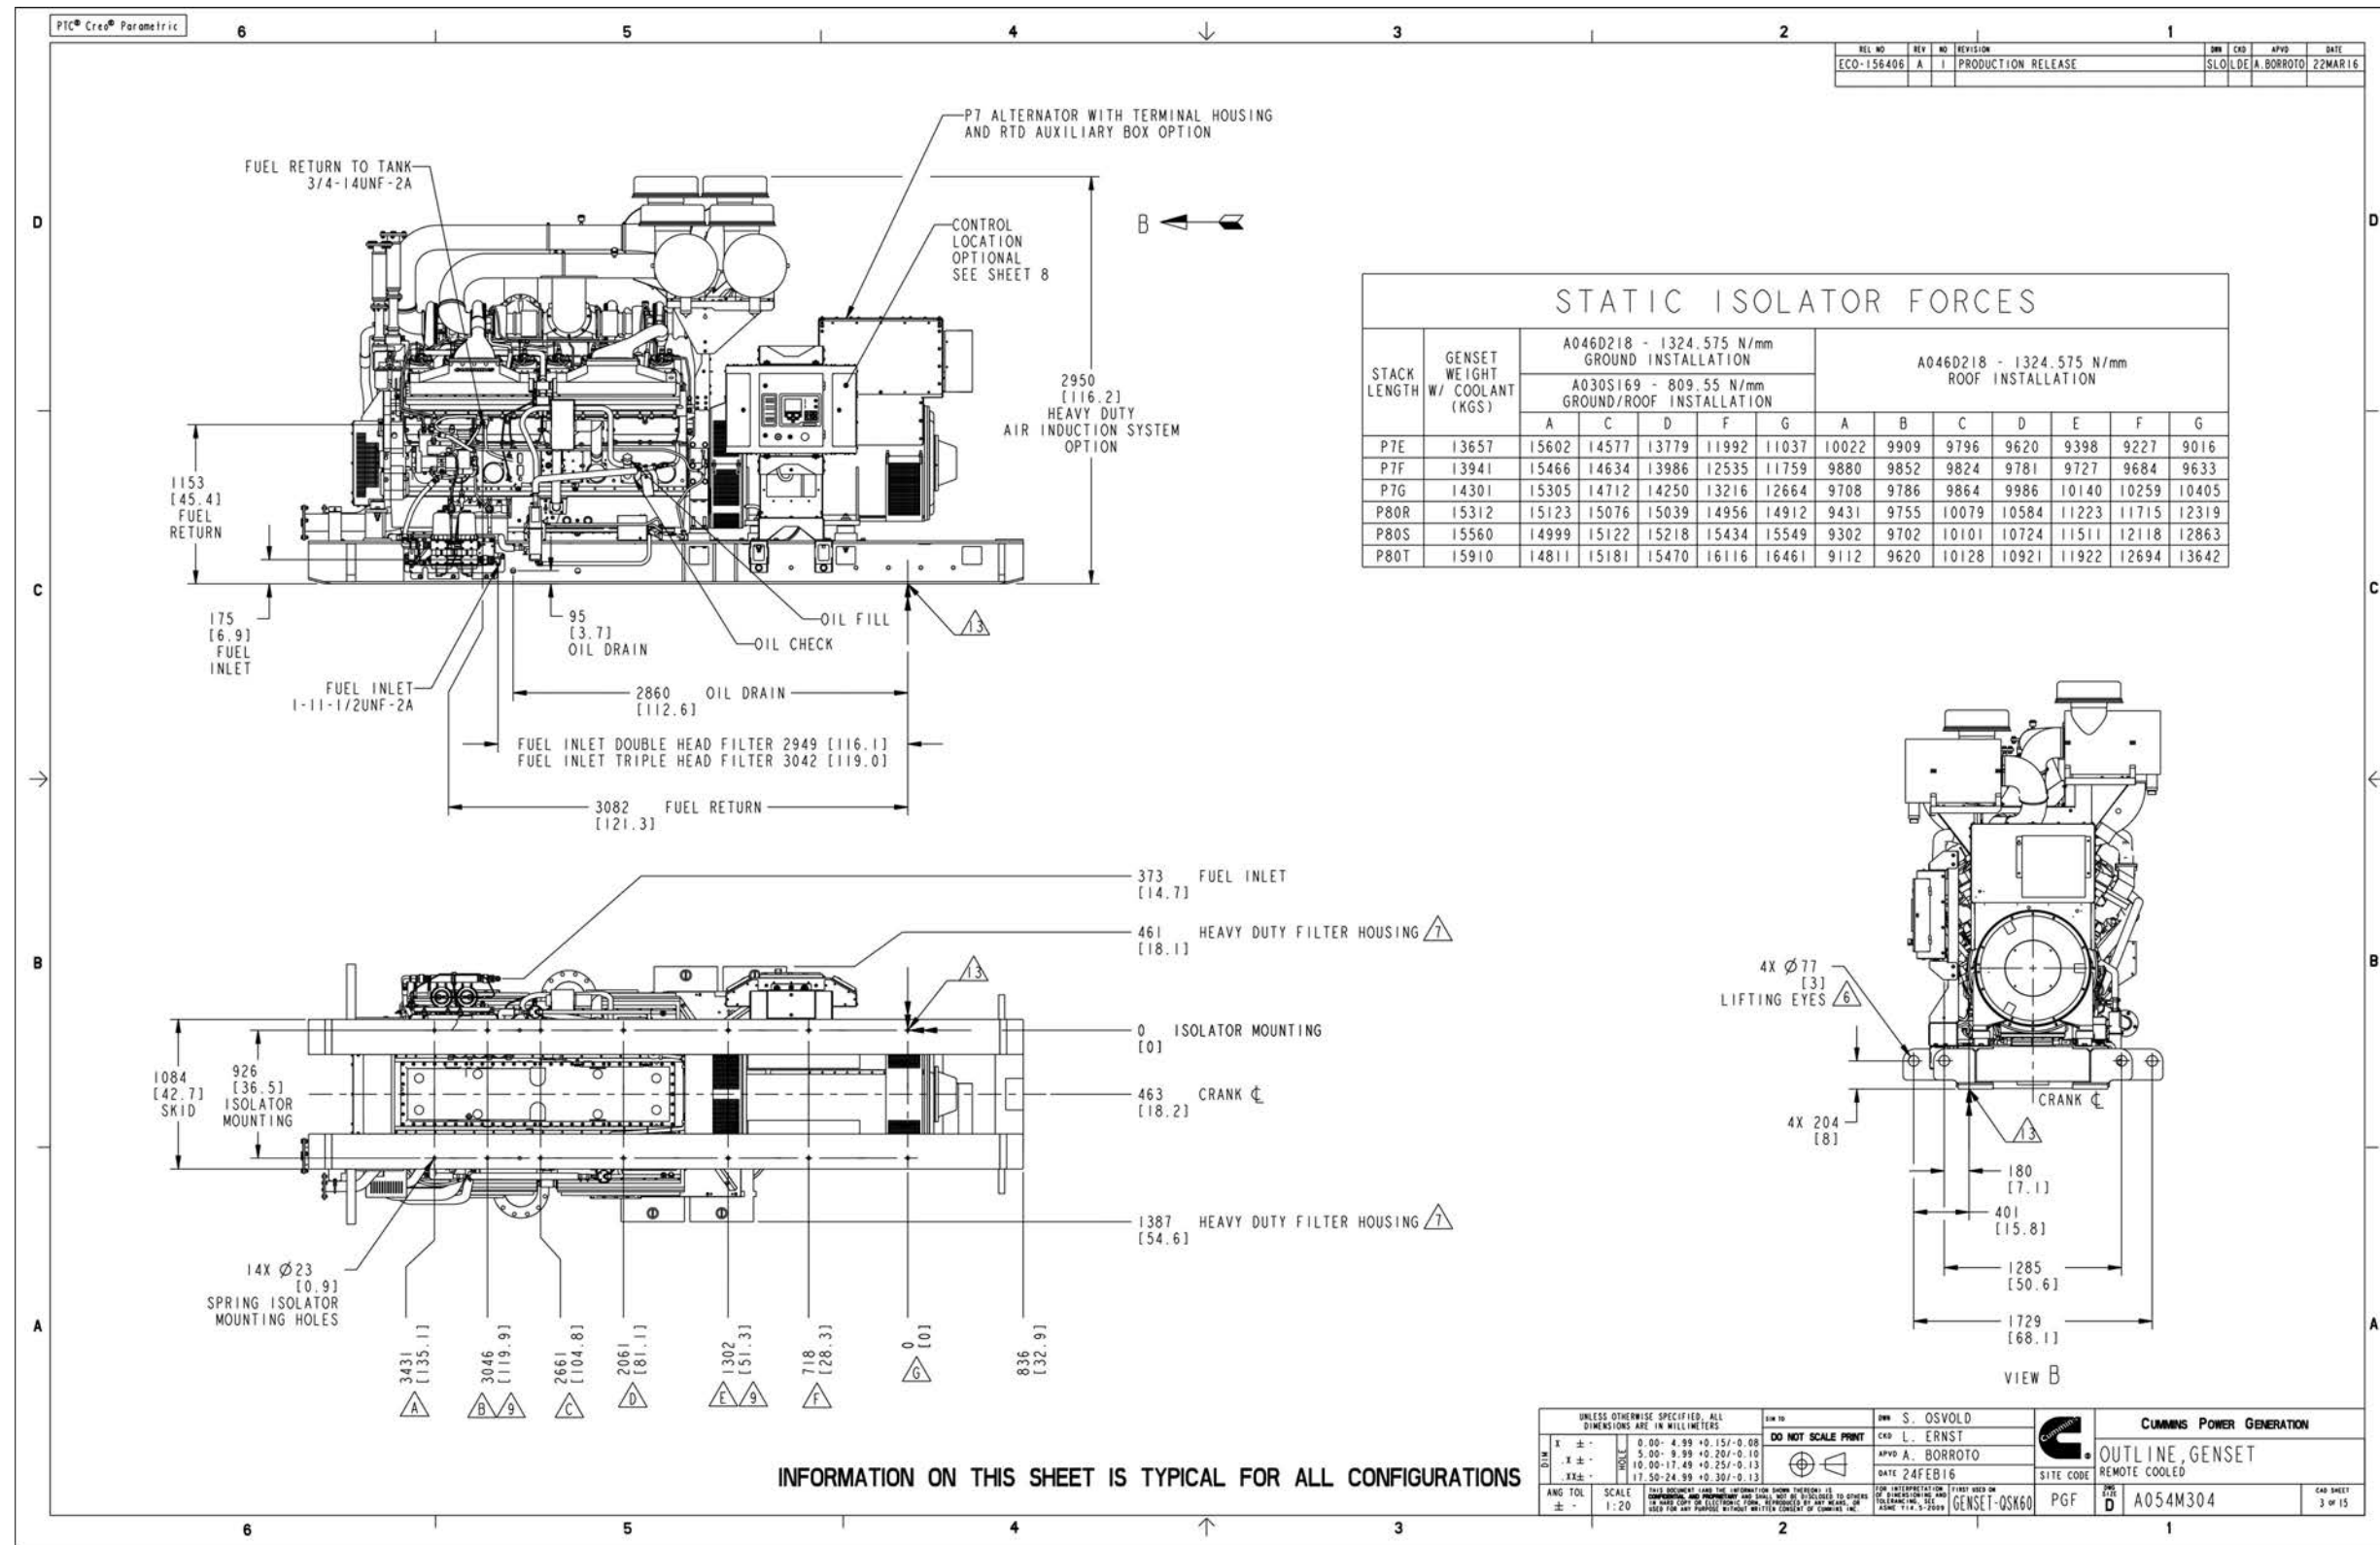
GENERATOR SET WITH REMOTE COOLING OUTLINE DRAWING (SHEET 3)
